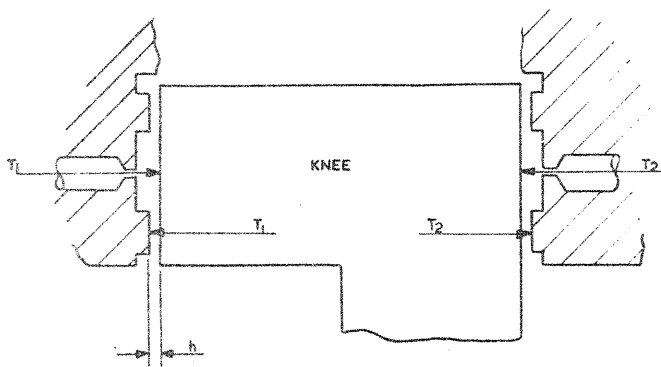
VERTICAL SECTION THROUGH TRANSVERSE SLIDE GUIDEWAY AND DETAILS OF PAD.
